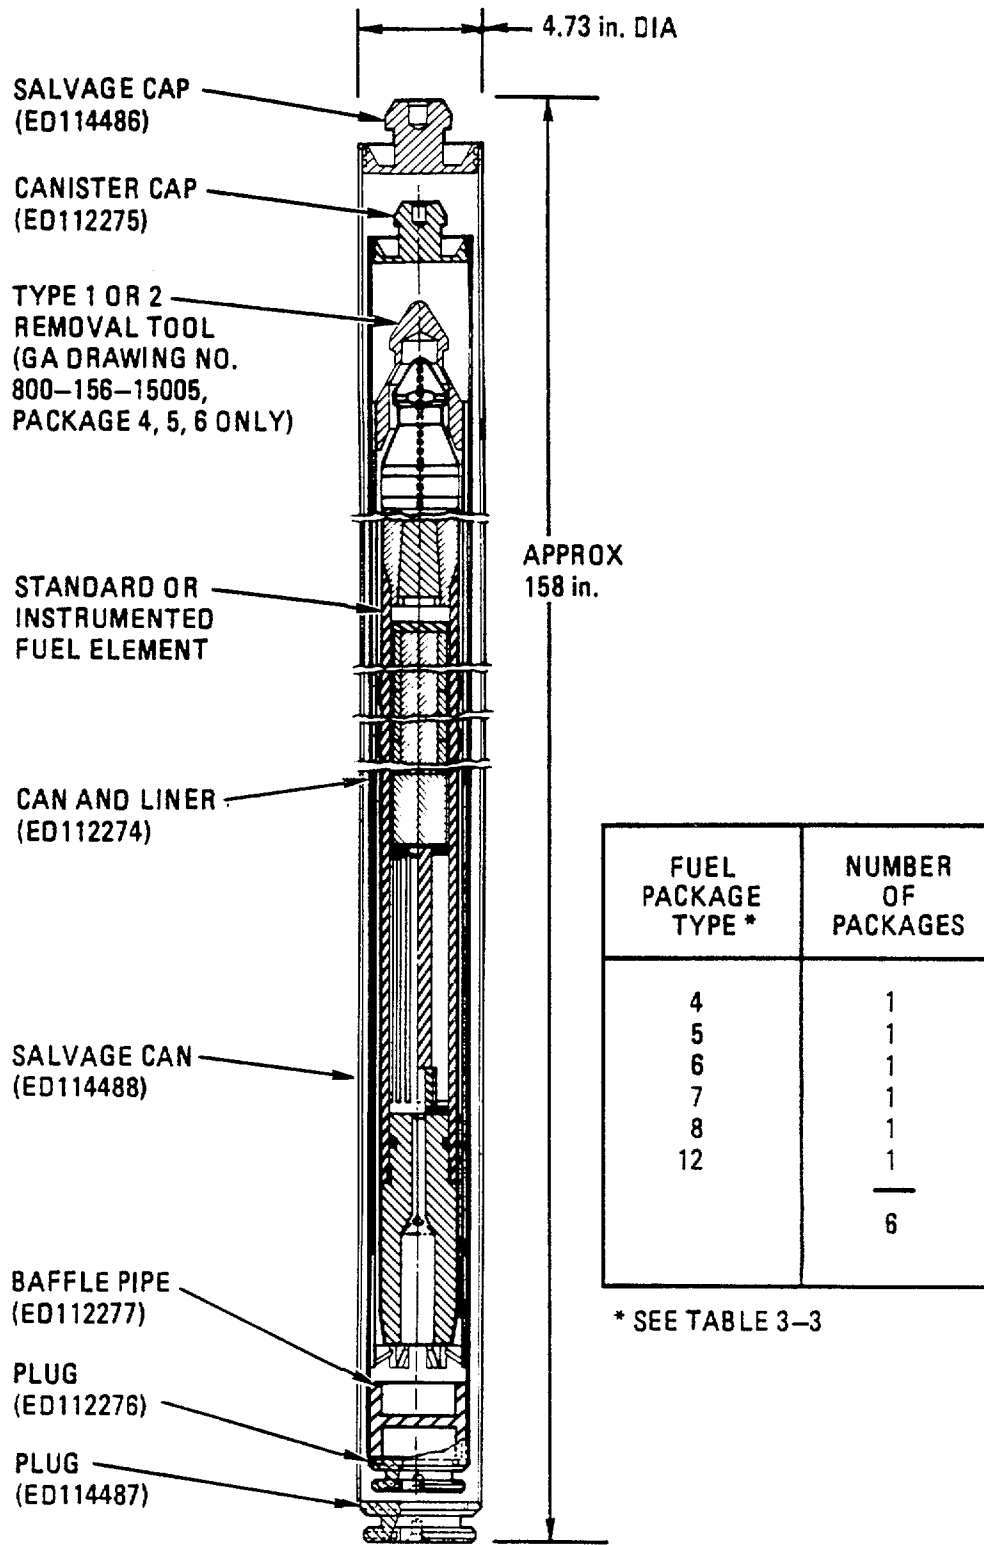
D.9. PBI/l failed fuel element in storage canister with removal tool in salvage canister
